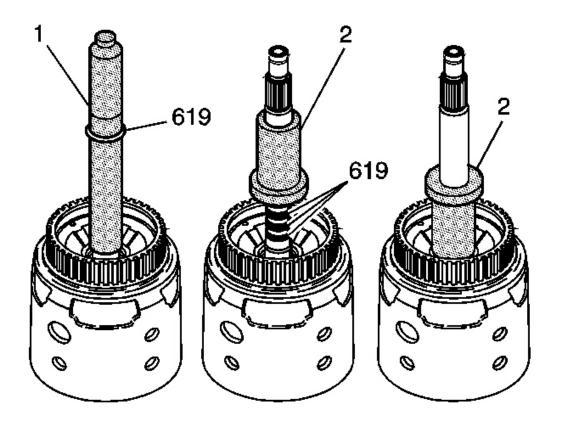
Identifying Turbine Shaft Oil Seal Rings Courtesy of GENERAL MOTORS CORP.
